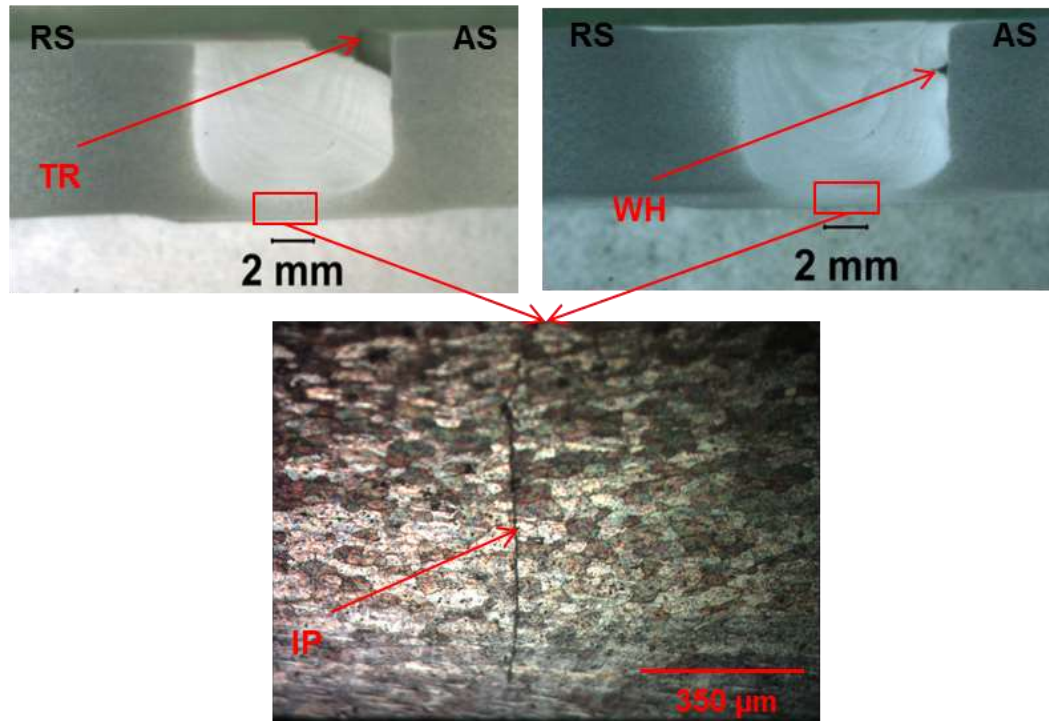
Cold weld showing TR, WH, and IP defects.
